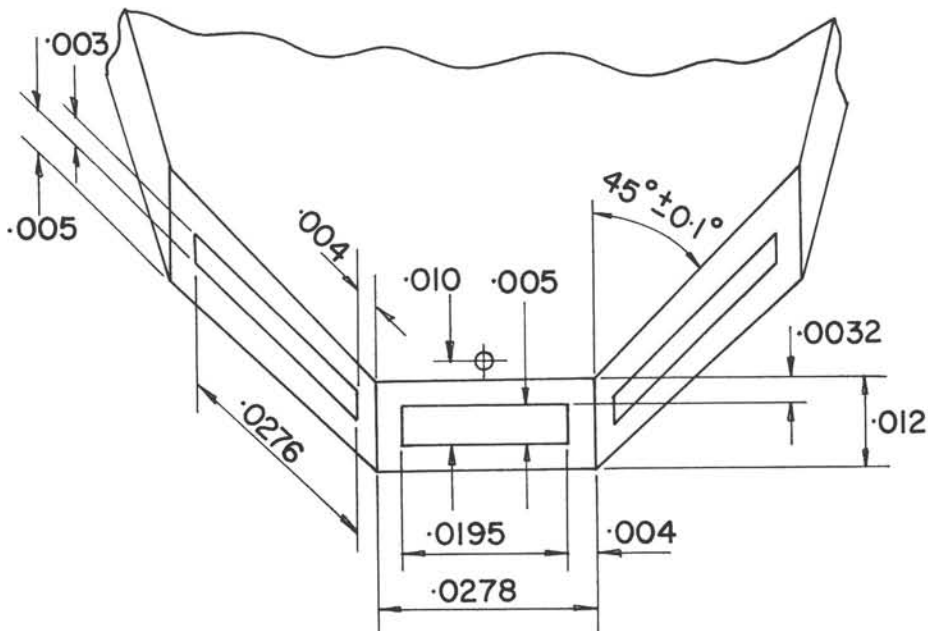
HEAD OF COBRA PROBE, DESIGN DIMENSIONS
